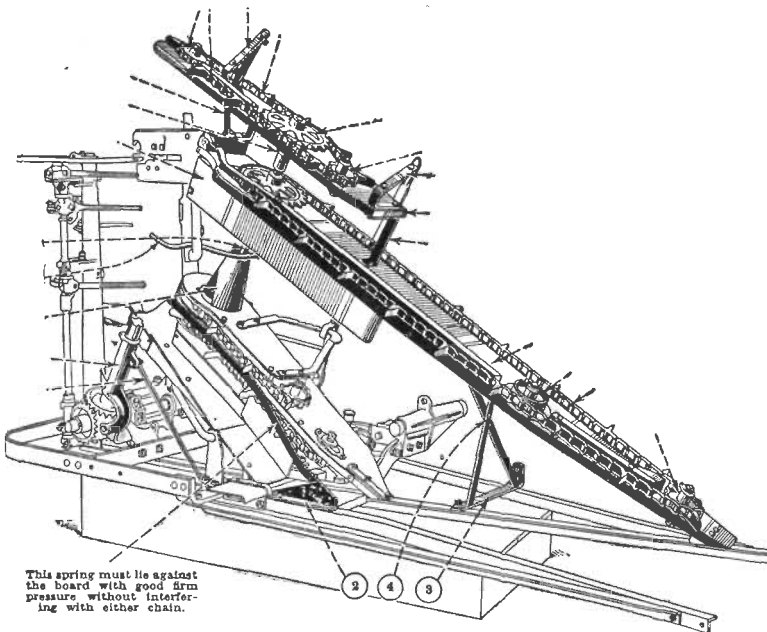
Side view of upper and lower gathering chains on left side of binder.
